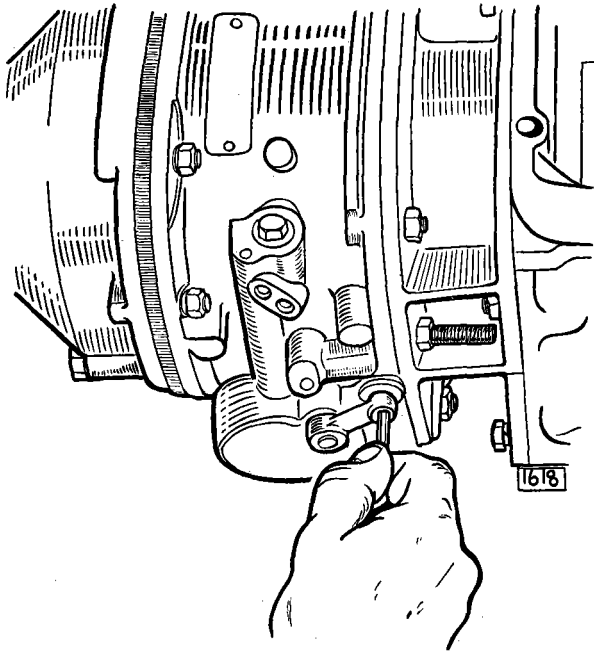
Aligning the hole in the valve setting lever with the corresponding hole in the housing.
